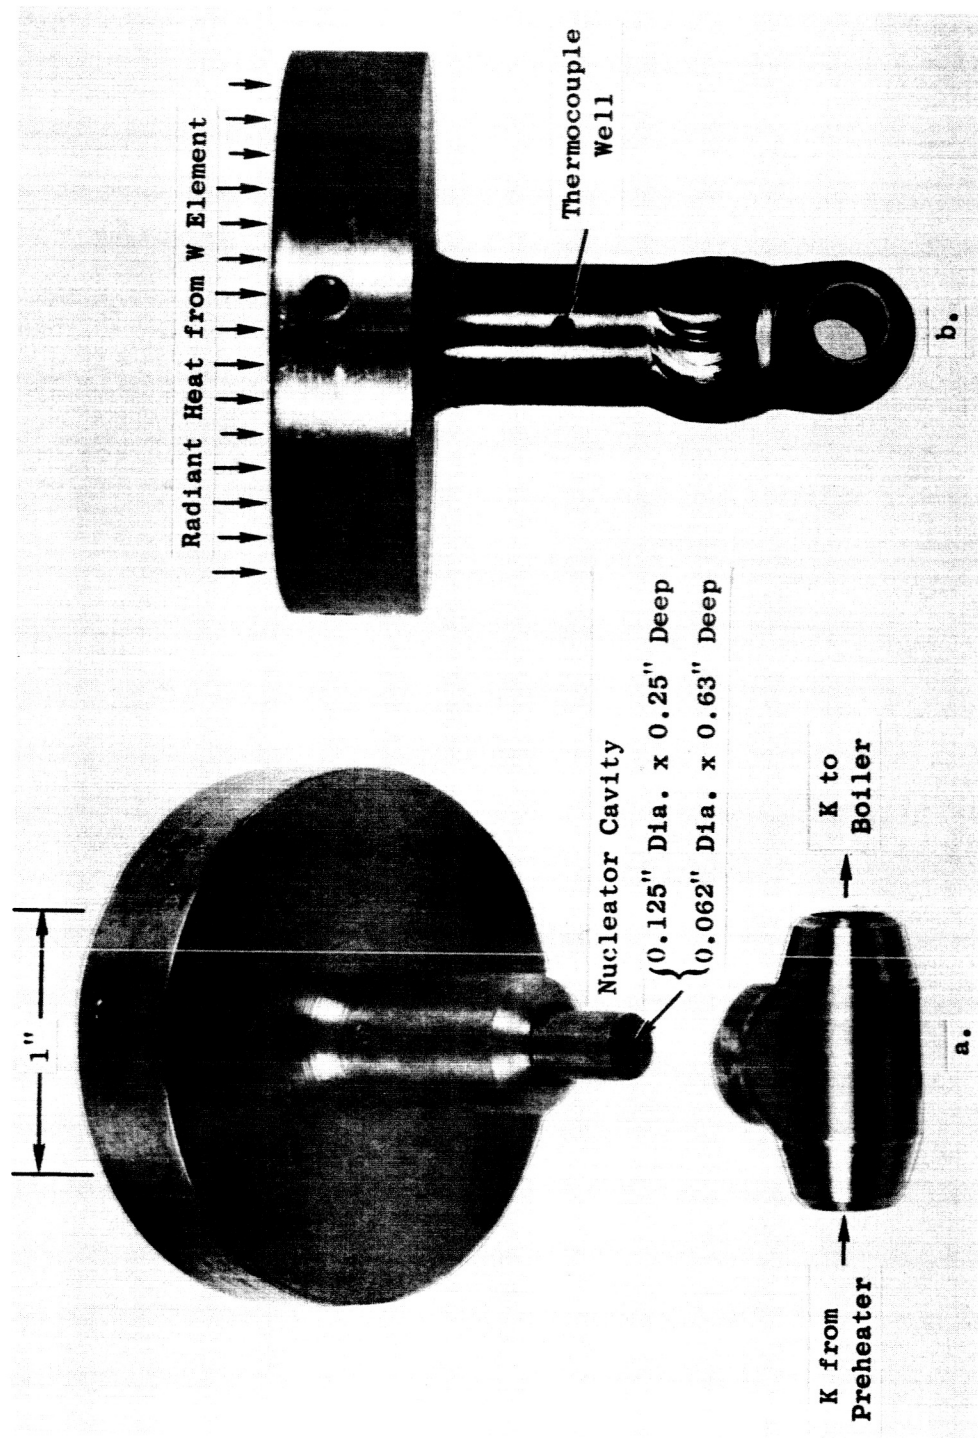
Vapor Nucleator (Cb-lZr) for the Prototype Corrosion Loop a) Before and b) After Welding. a. (Orig. - C64122904) b. (Orig. - C64123003)
